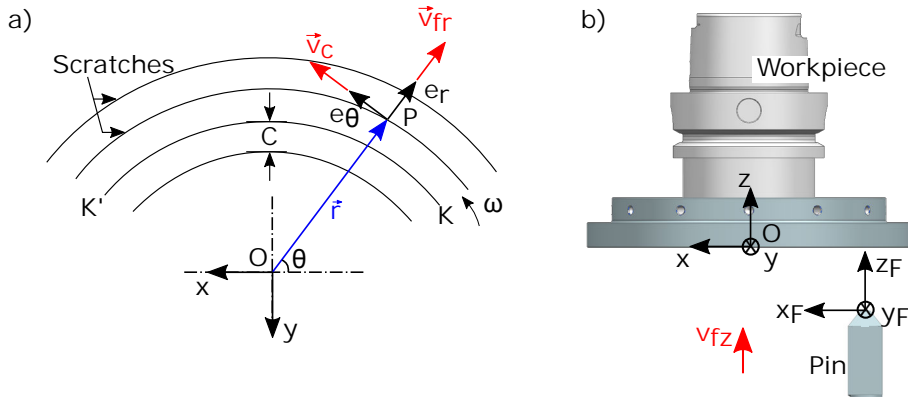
(a) Scratch paths on the workpiece surface viewed from the bottom of the workpiece. (b) Motion of the grain cutting edge.
